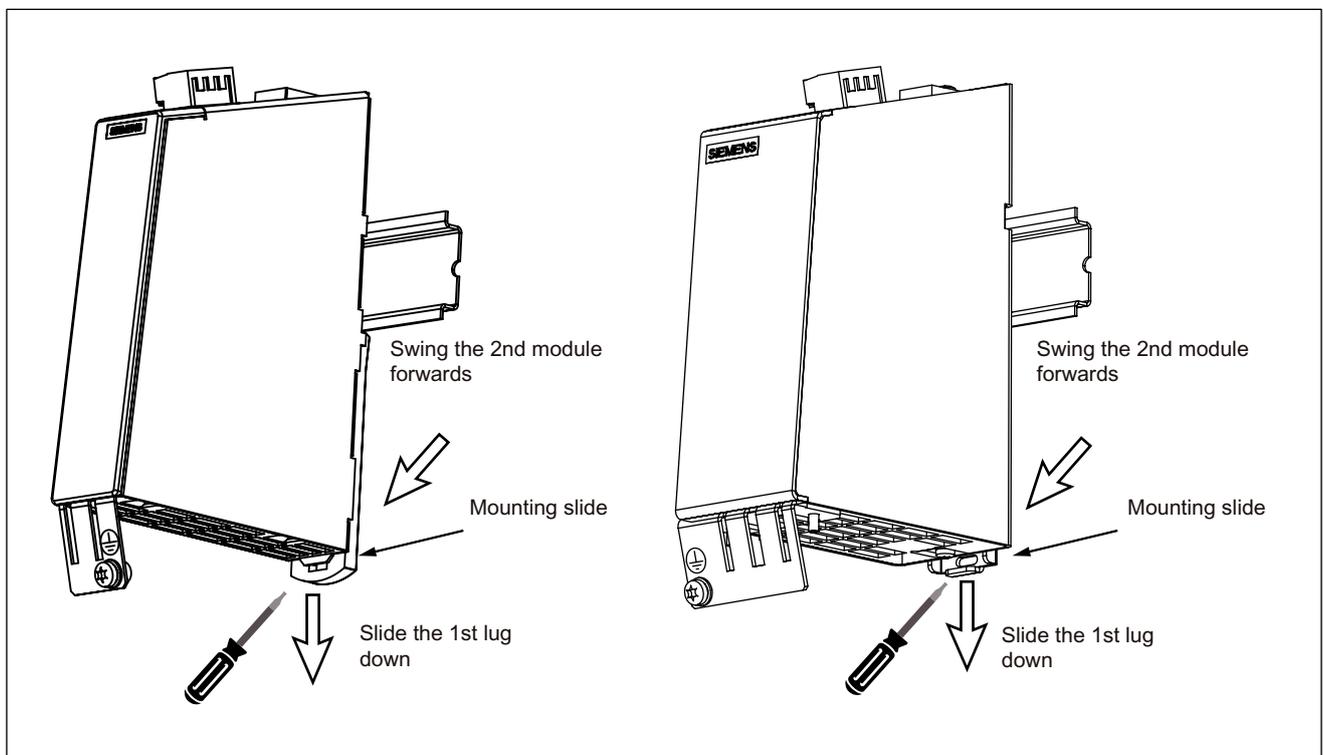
Disassembly of a DIN rail with a 30mm wide component (left) and with a 50mm wide component (right).
